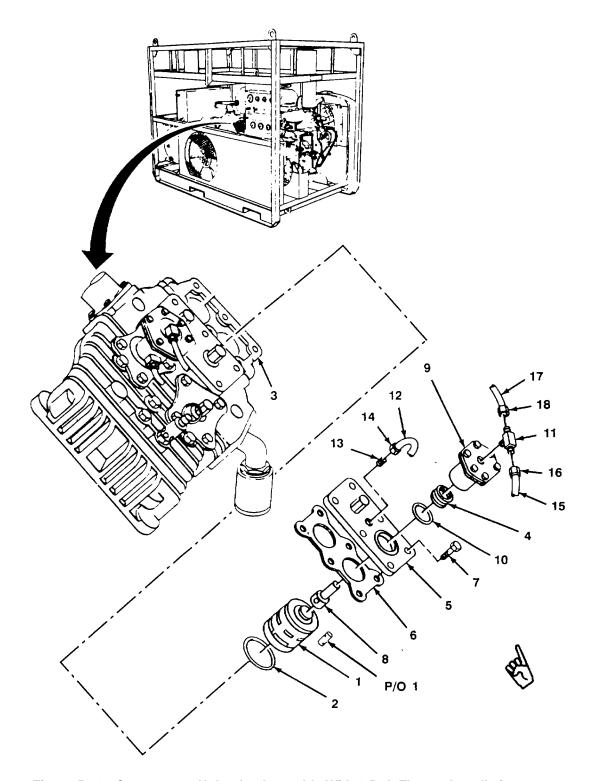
Compressor Unloader Assembly With 6 Bolt Flange, Installation.
